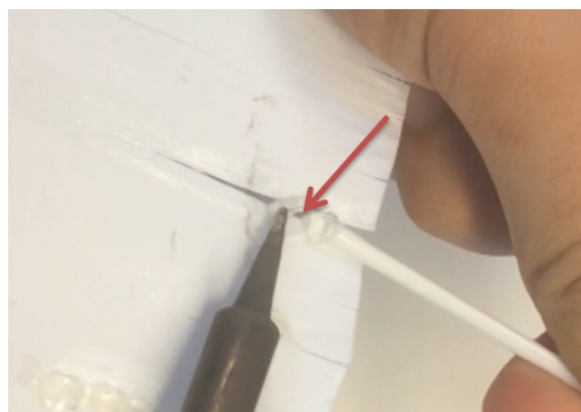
Repairing a large crack with a soldering machine(3)
